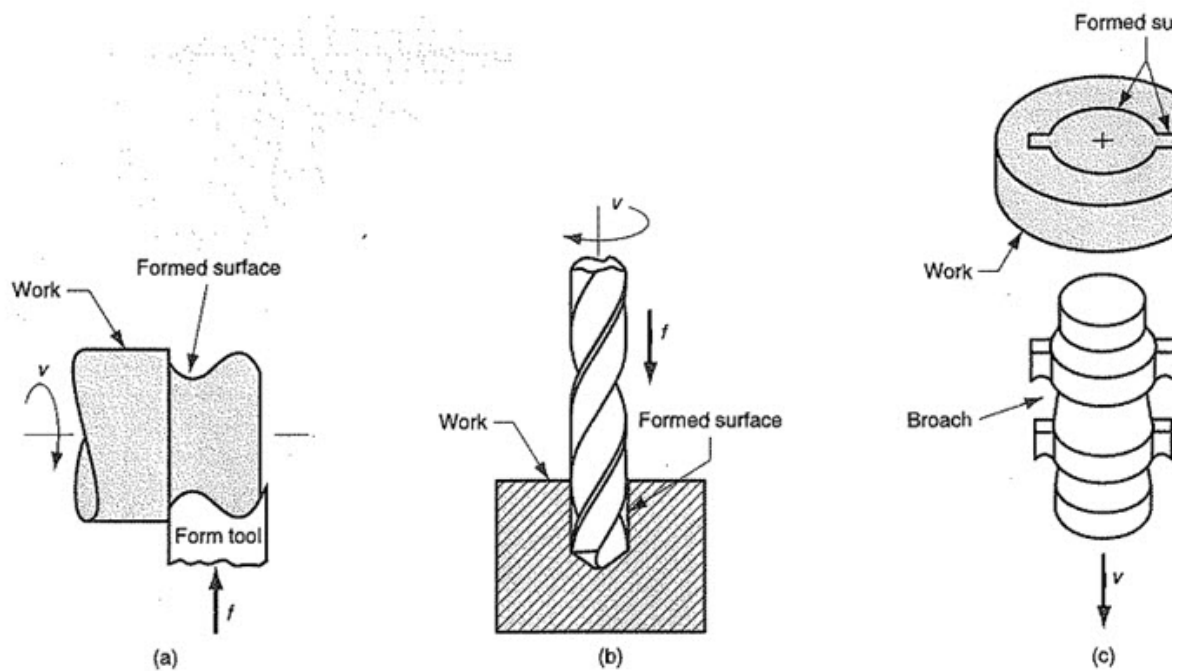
Forming to create shape in machining: (a) form turning, (b) drilling, and (c) broaching.
